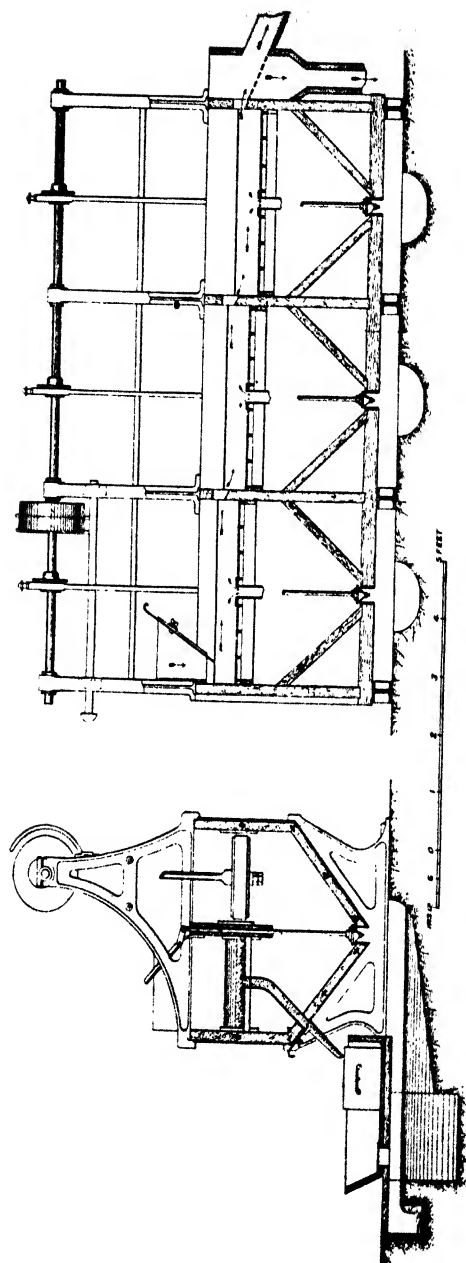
Central discharge jig. Longitudinal and transverse sections.
